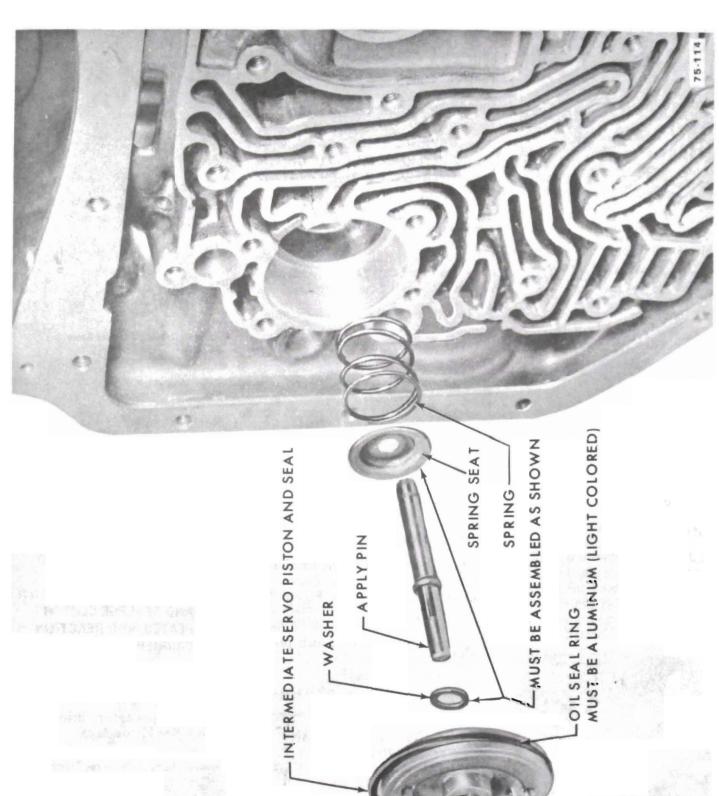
Intermediate Servo Assembly - Exploded View
